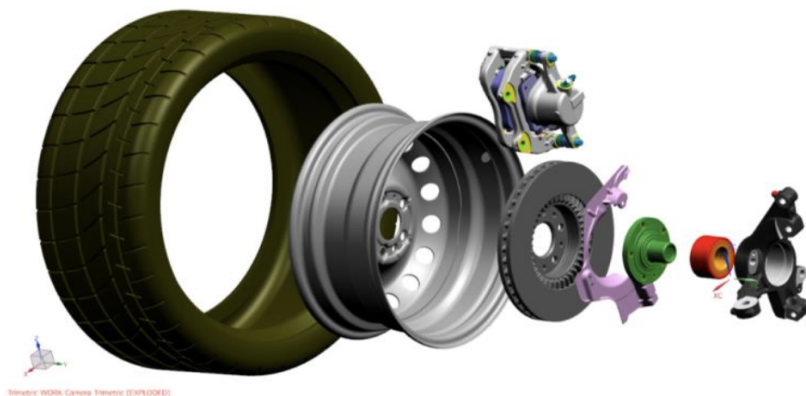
Expanded view of brake components from left to right: tire, rim, caliper and pads, disc, dust shield, hub, knuckle.
